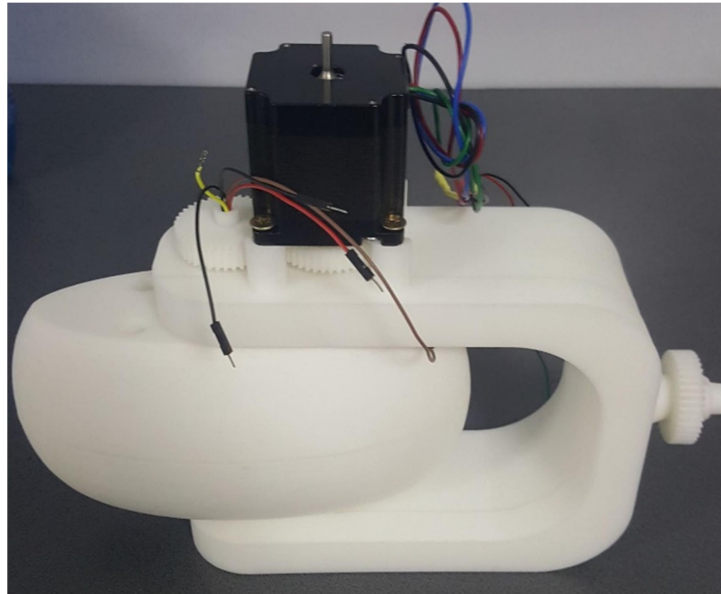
Assembling the drive arm blade with the drive shaft
